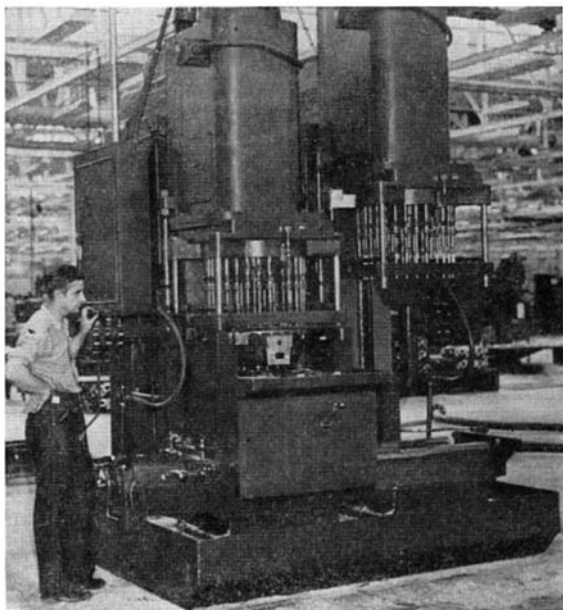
Duplex hydraulic feed Baker drill putting 38 holes in the crankcase nose section of a Cyclone
